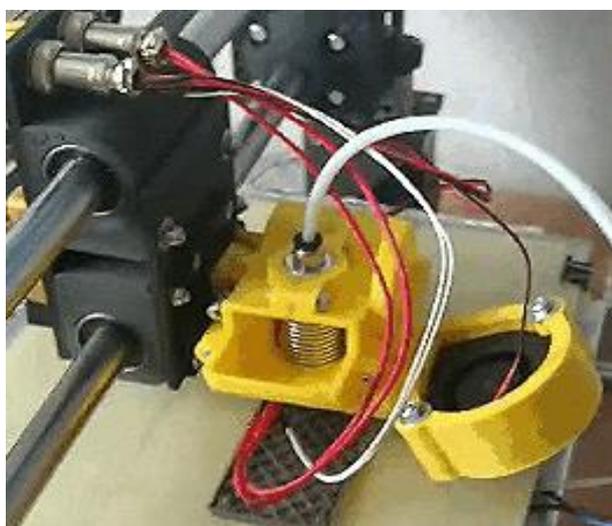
Modular hotend mounting system: 1 – platform with trapezoidal groove; 2 – E3D V6 extruder in a housing with a trapezoidal groove; 3 – hotend fixing bolt; 4 – MIC type wire connection
